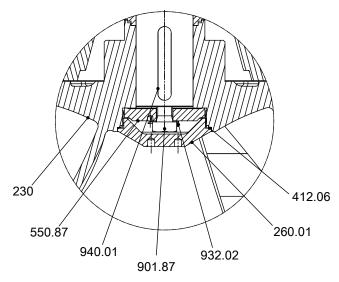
Impeller fastening elements, sizes 1000-420, 1000-421, 1000-500, 1200-630
